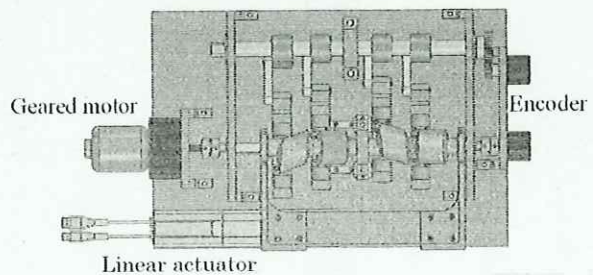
L-CVT which is composed of four slider crank mechanisms with solid cams and one-way clutches
